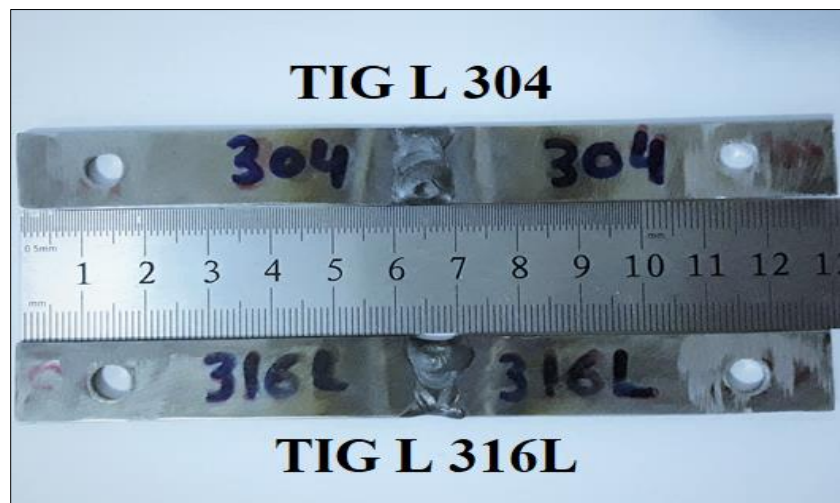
Standard welded SCC specimens of AISI 304 and AISI 316L austenitic stainless steel
